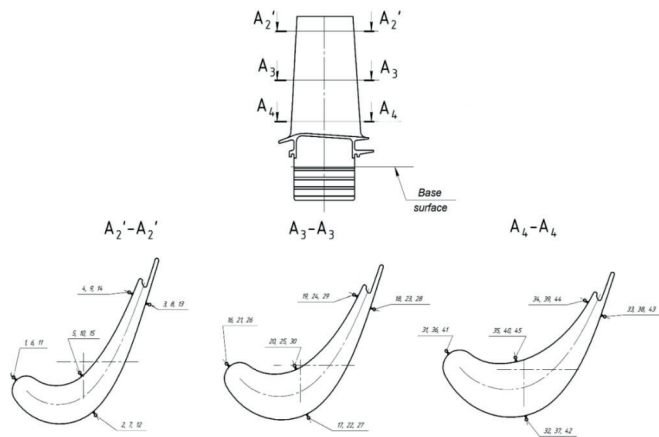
The layout for thermocouple instrumentation of the rotor blade profile on the gas side
